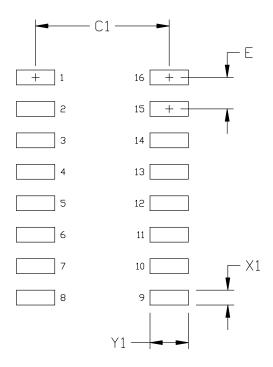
SOIC16 PCB Land Pattern Drawing
